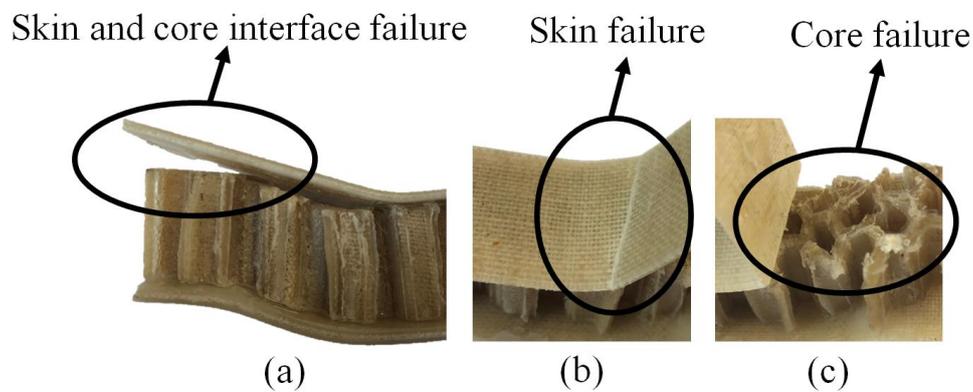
Failure mechanisms (a) Skin/core interface failure, (b) Skin failure, (c) Core failure
